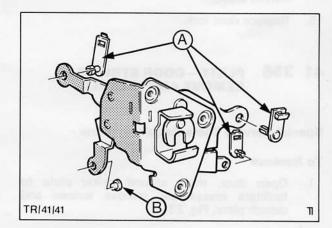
Bush and clip assembly front door (hinged) lock A - clips B - bush
